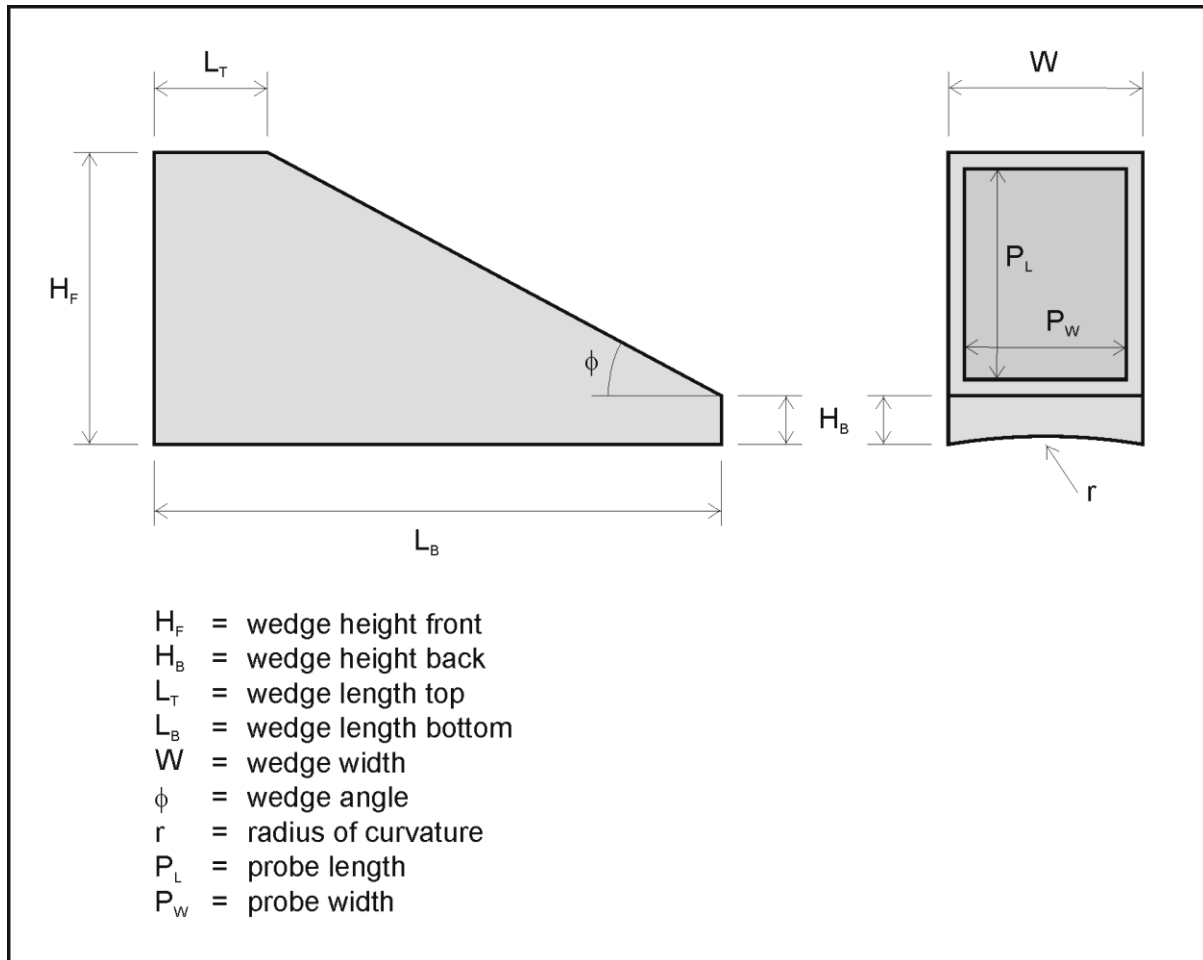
Schematic of a wedge for the inspection of butt fusion joints, showing the dimension parameters.
